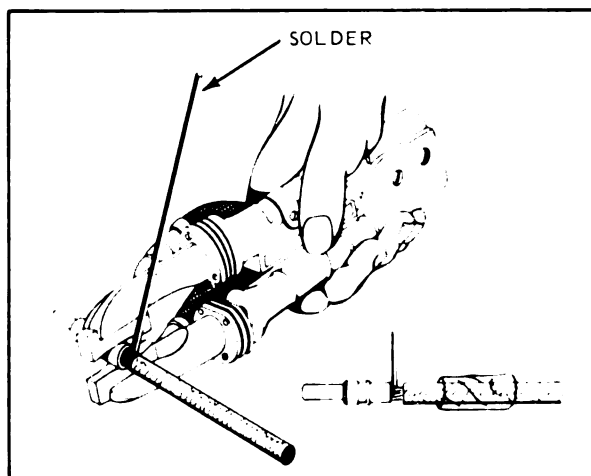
Resistance Soldering Pliers for Large Contacts
